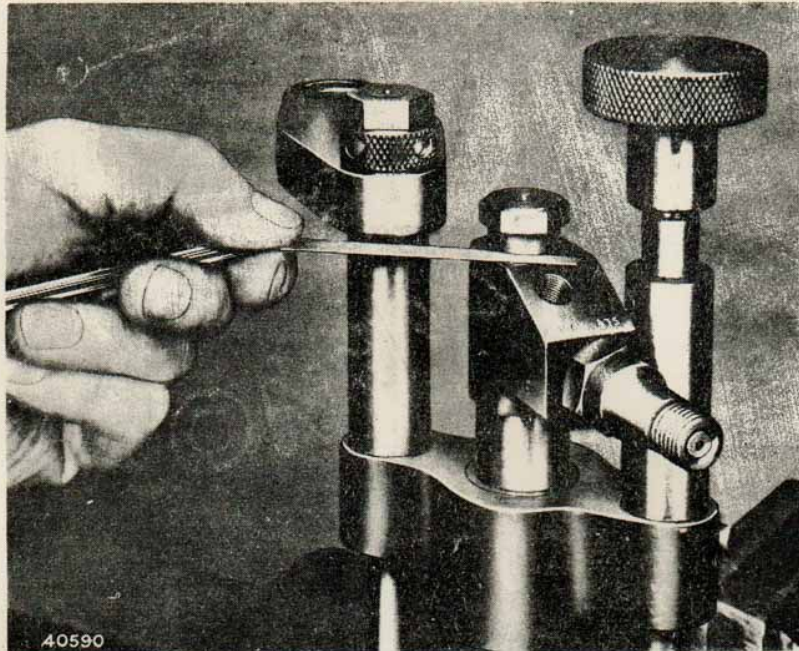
CHECKING THE NEEDLE VALVE LIFT.
